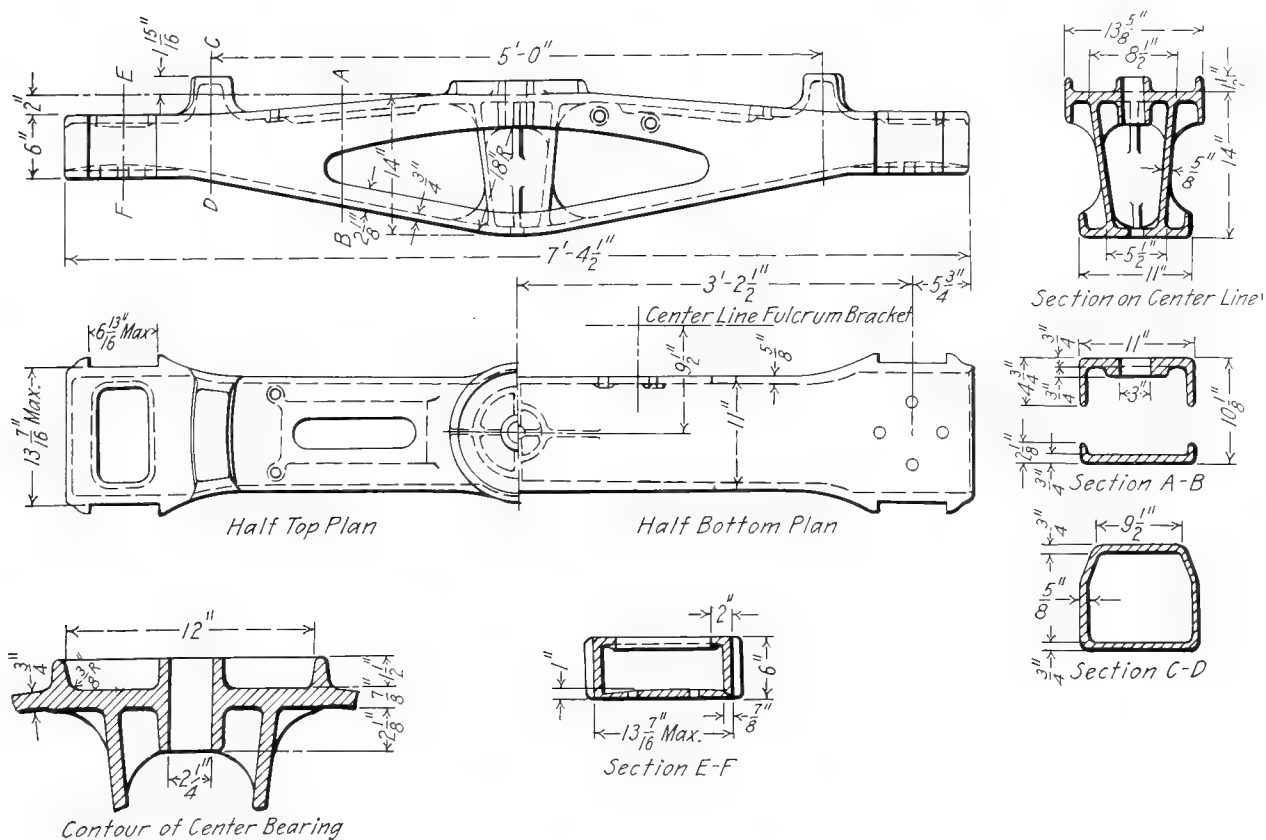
Truck Bolster for 50-Ton Capacity Freight Cars. Buckeye Steel Castings Company.
